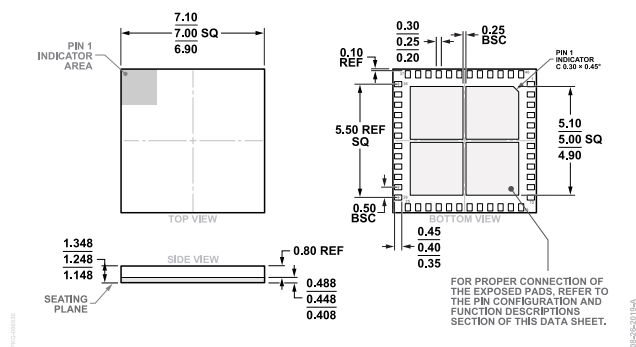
48-Lead Land Grid Array Package [LGA] (CC-48-6) 7 mm x 7 mm Body, Dimensions shown in millimeters.
